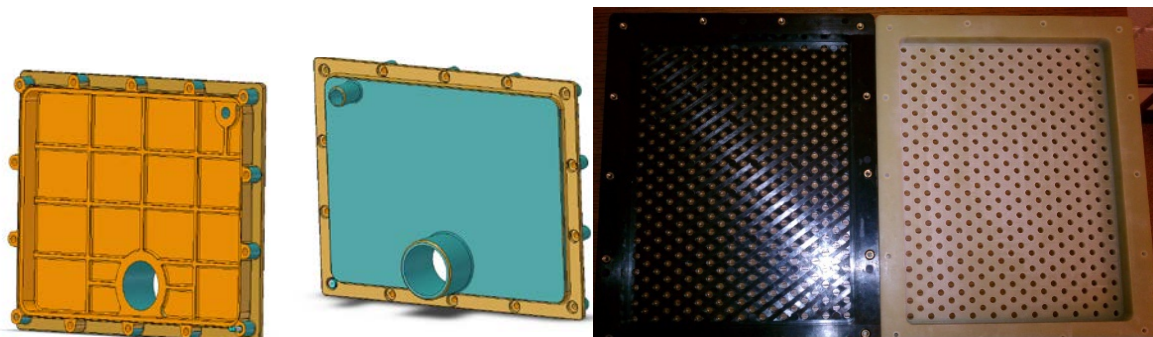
Compression molded end cap drawings, and pictures of molded tubesheet (black color) compared with machined tube sheet (yellow color)
